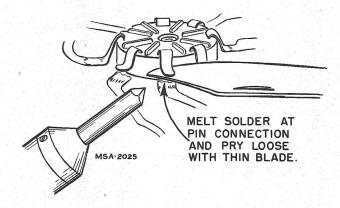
Method of Replacing Tube Socket in Printed Circuit Boards
